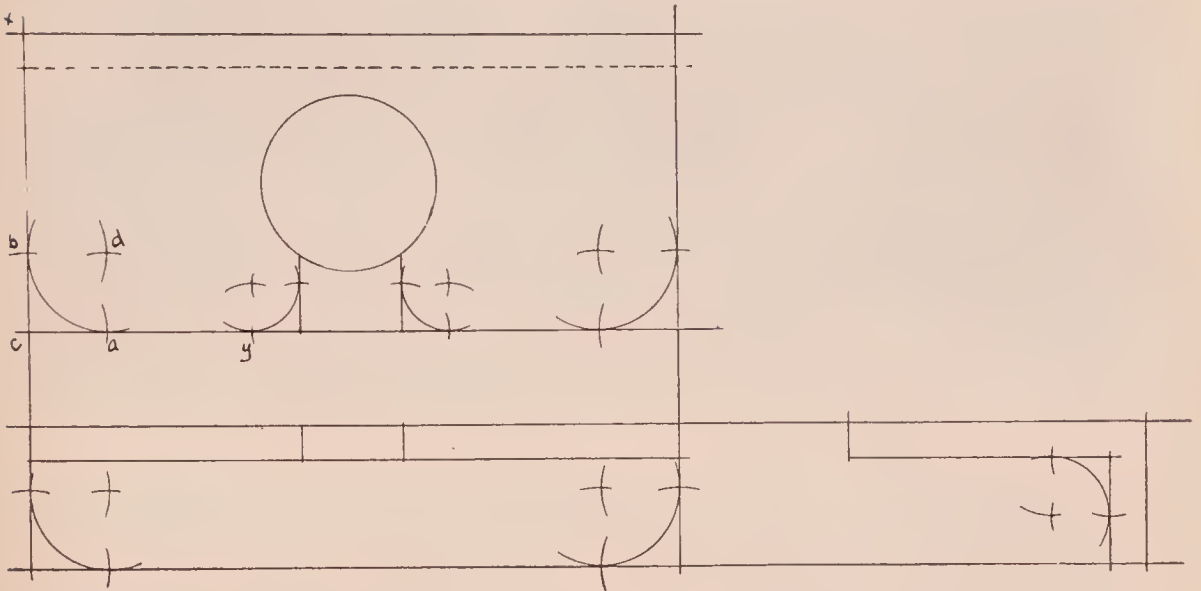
Three views of a cast iron tool rack showing use of rounded corners and fillets
